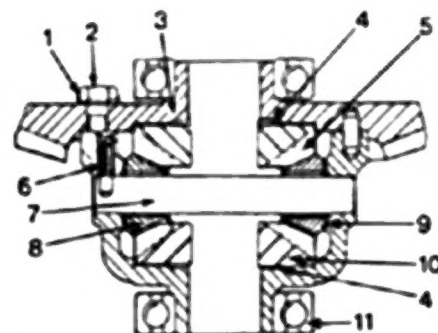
Sectional view of bevel gear and differential assembly removed from differential housing.
